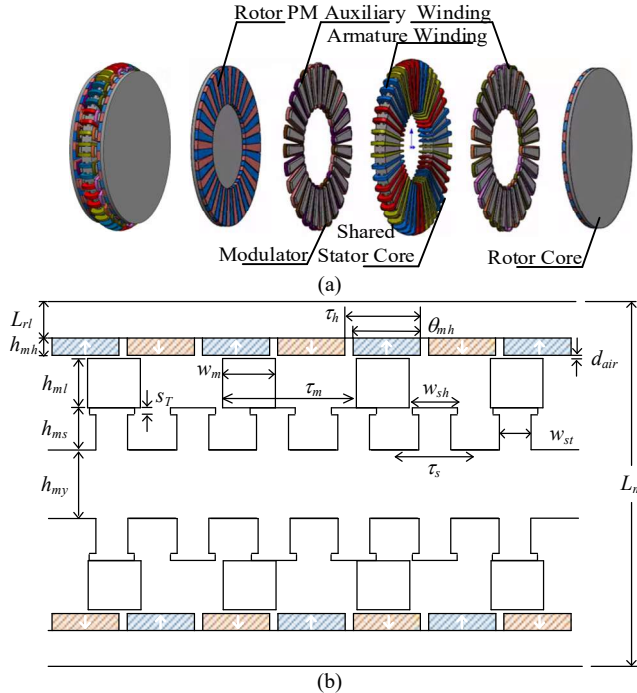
Structure configuration of the proposed machine (a) 3-D and exploded view. (b) 2-D cross-section at average diameter and parameters.
